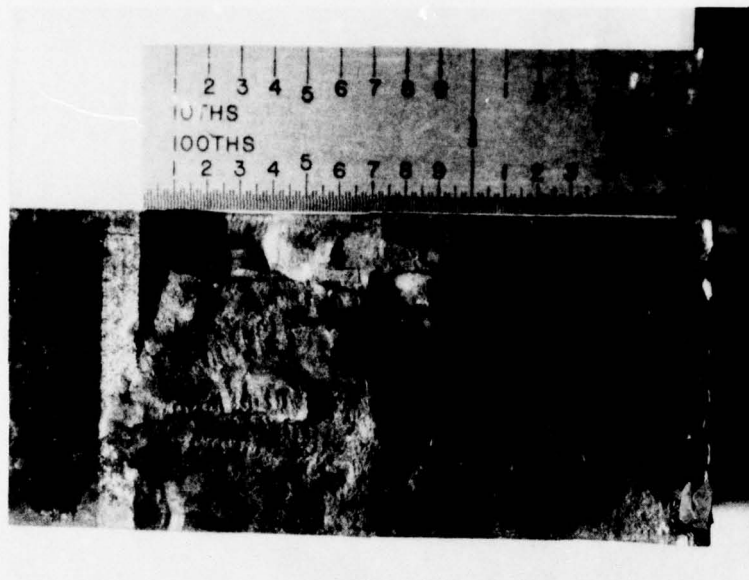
HY-130 weld specimen D-5 fracture
